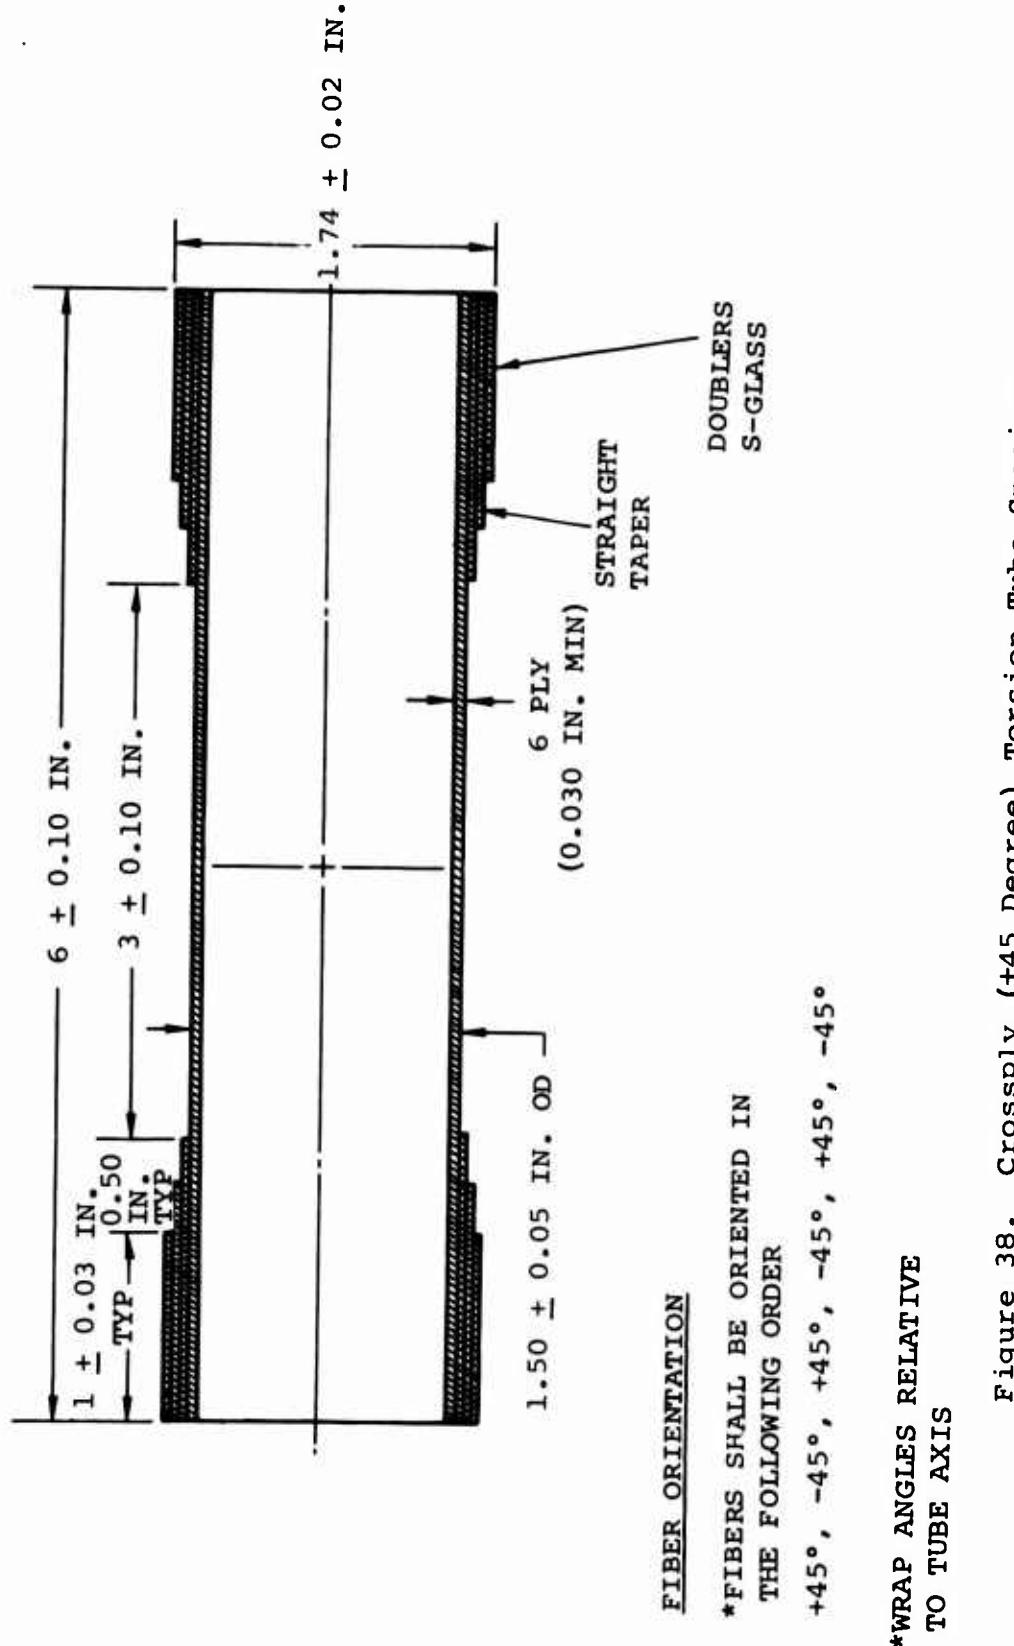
Crossply (± 45 Degree) Torsion Tube Specimen.
